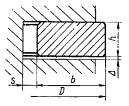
Several piston rings placed Fig. 290. Design-clearances between in one groove
